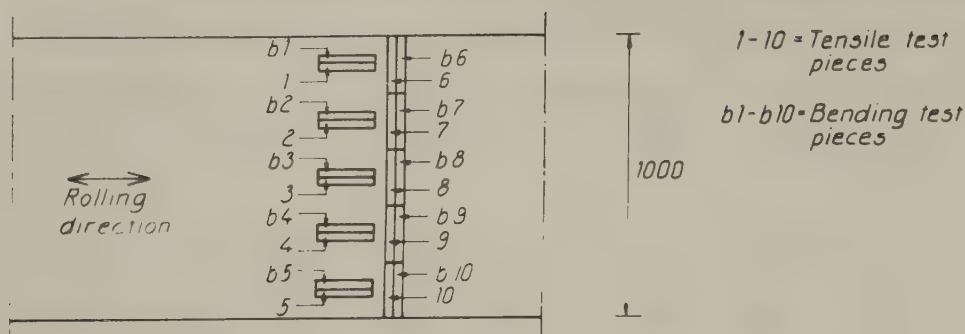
Positions at which tensile and bending test pieces were taken from an unused cold-rolled sheet.
